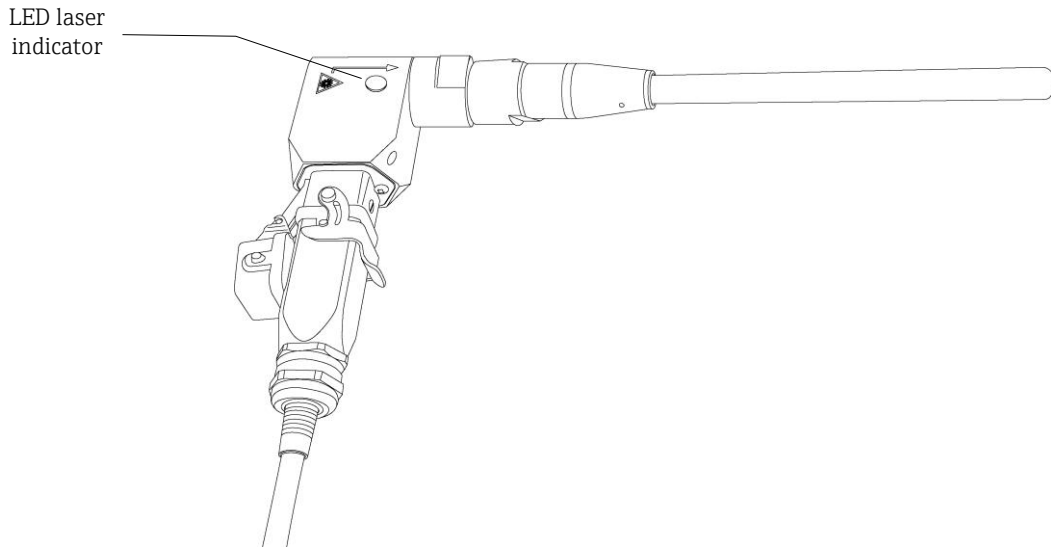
LED laser indicator on right-angle fiber connector (EO style) assembly
